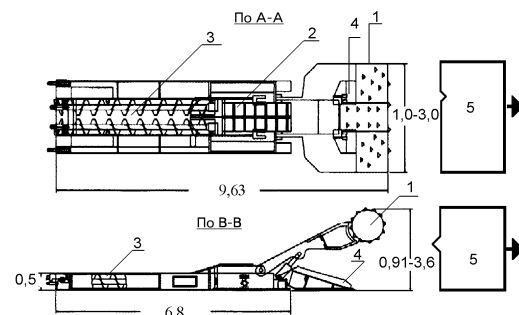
Cutter head: 1 – working instrument (cutter bit); 2 – short transporter; 3 – auger panel, 4 – loading device; 5 – mining room
